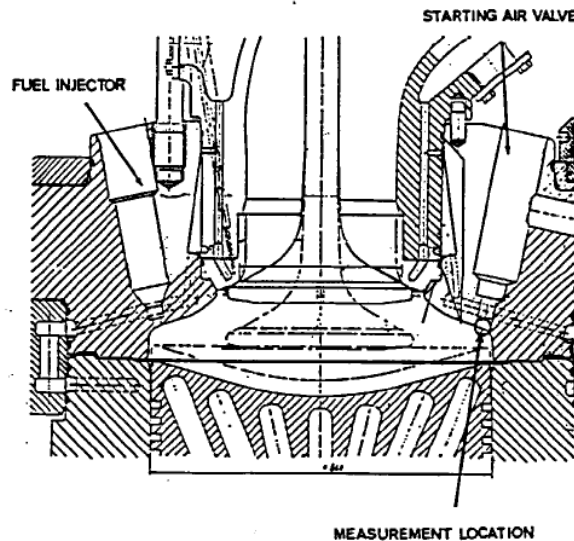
Combustion chamber geometry and measurement location in the Sulzer two-stroke marine diesel engine in the investigation of Boulouhos et al. [8].
